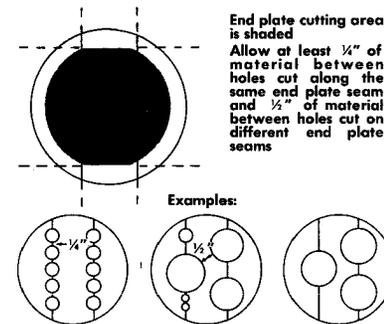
Three-Section End Plate Hole Cutting Instructions
